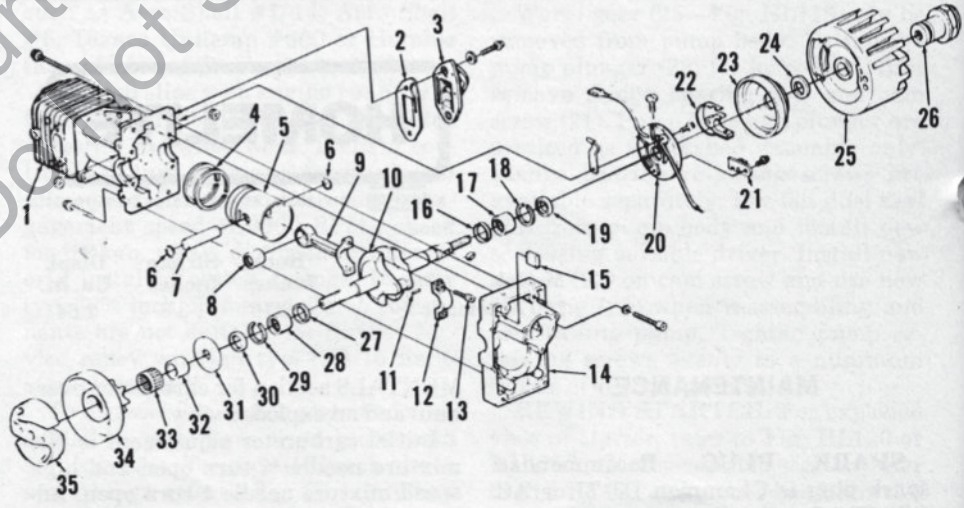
Exploded view of 150 Automatic engine, clutch and flywheel assemblies.
